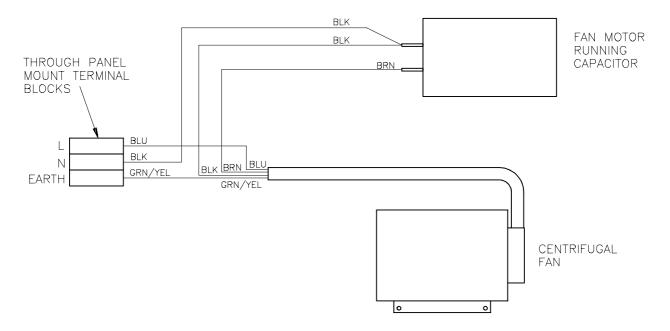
Wiring Diagram Fan Supply for Frames G & H, Drg No. HJ 463151 D 001
